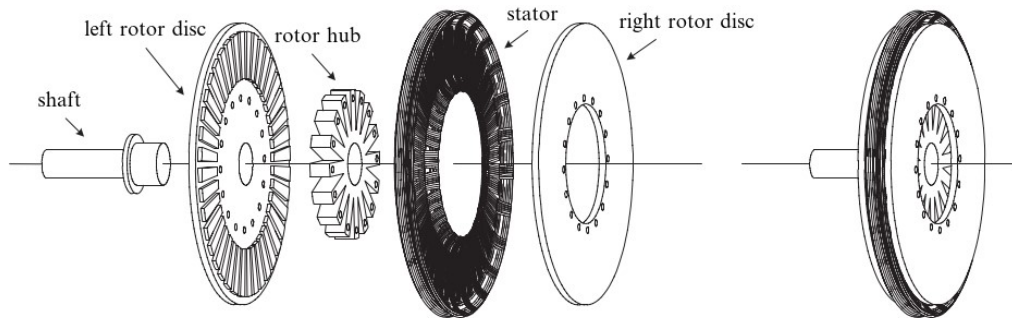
Exploded view of shaft-integral fan in AFPM machine. Source: [61]
